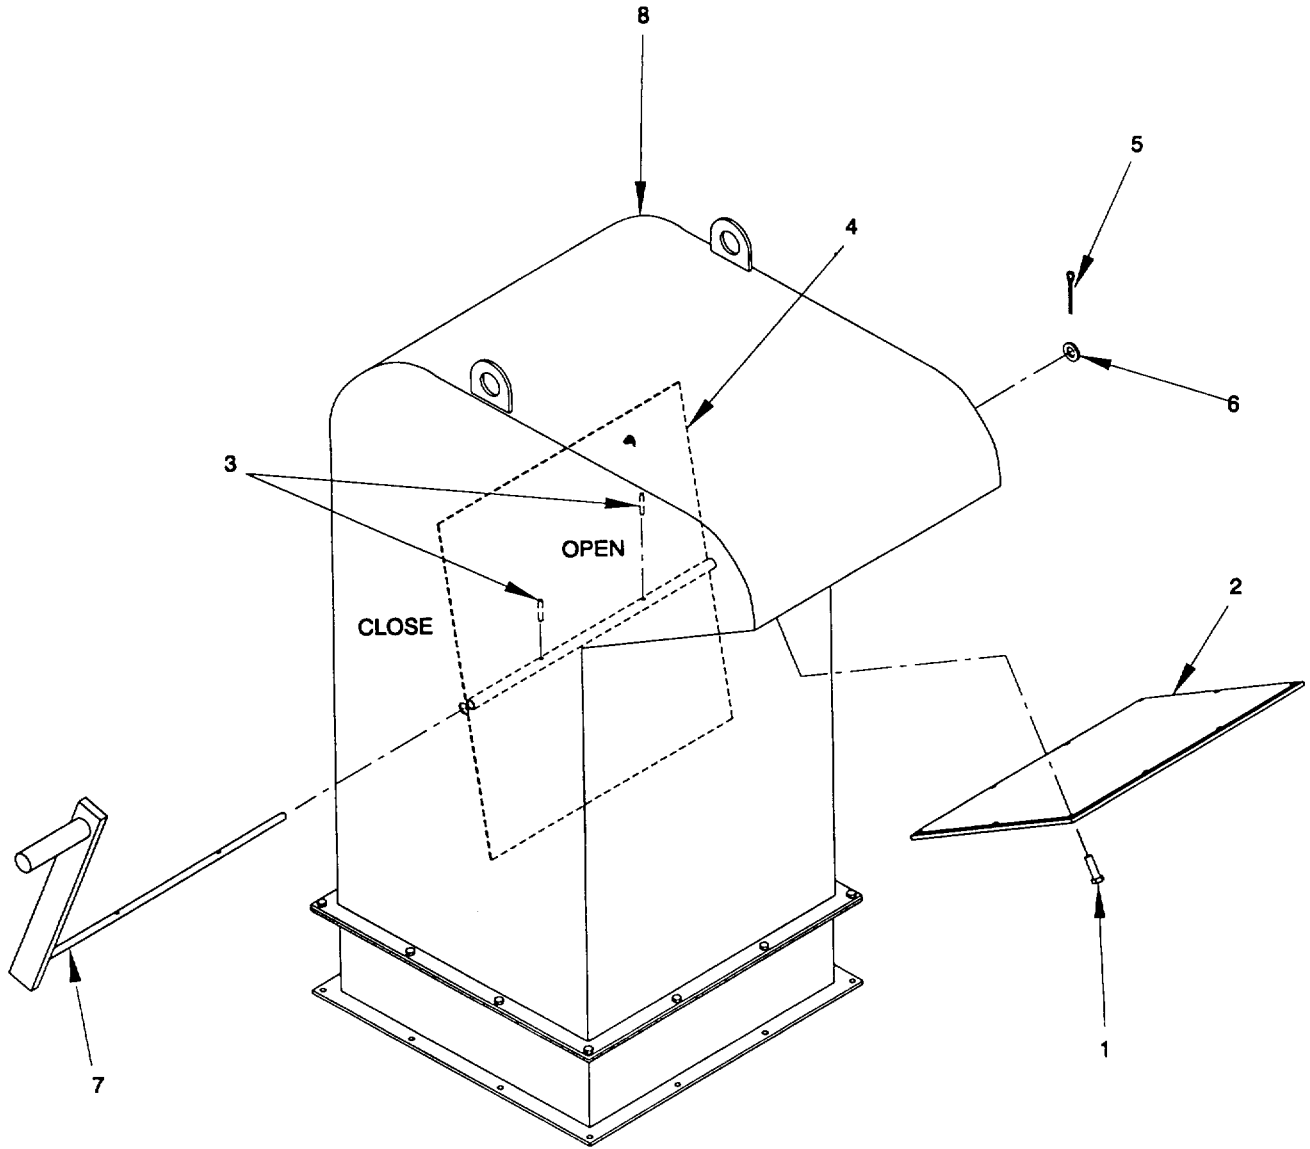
Locking Handle, Exhaust Plenum, Remove/Install.
